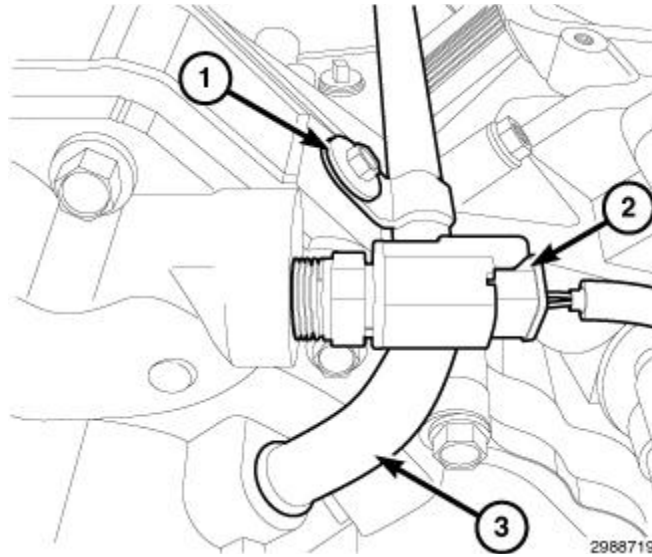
Coolant Temperature (ECT) Sensor Electrical Connector, Heater Tube & Retaining Bolt
